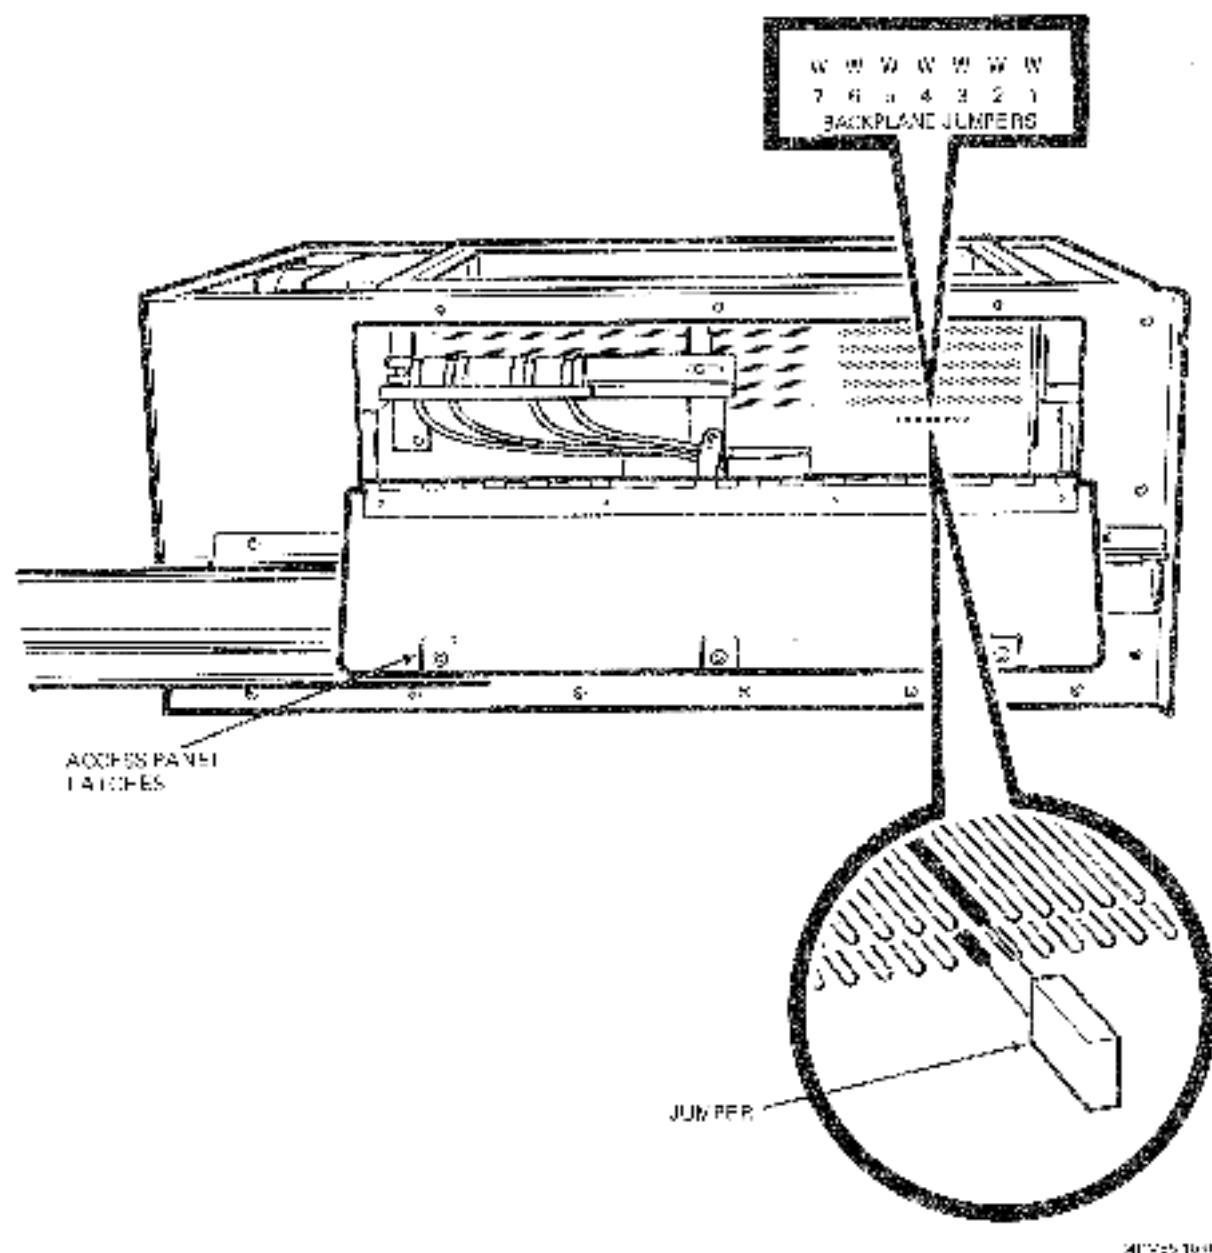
CIPA Mounting Box - Backplane Jumpers
